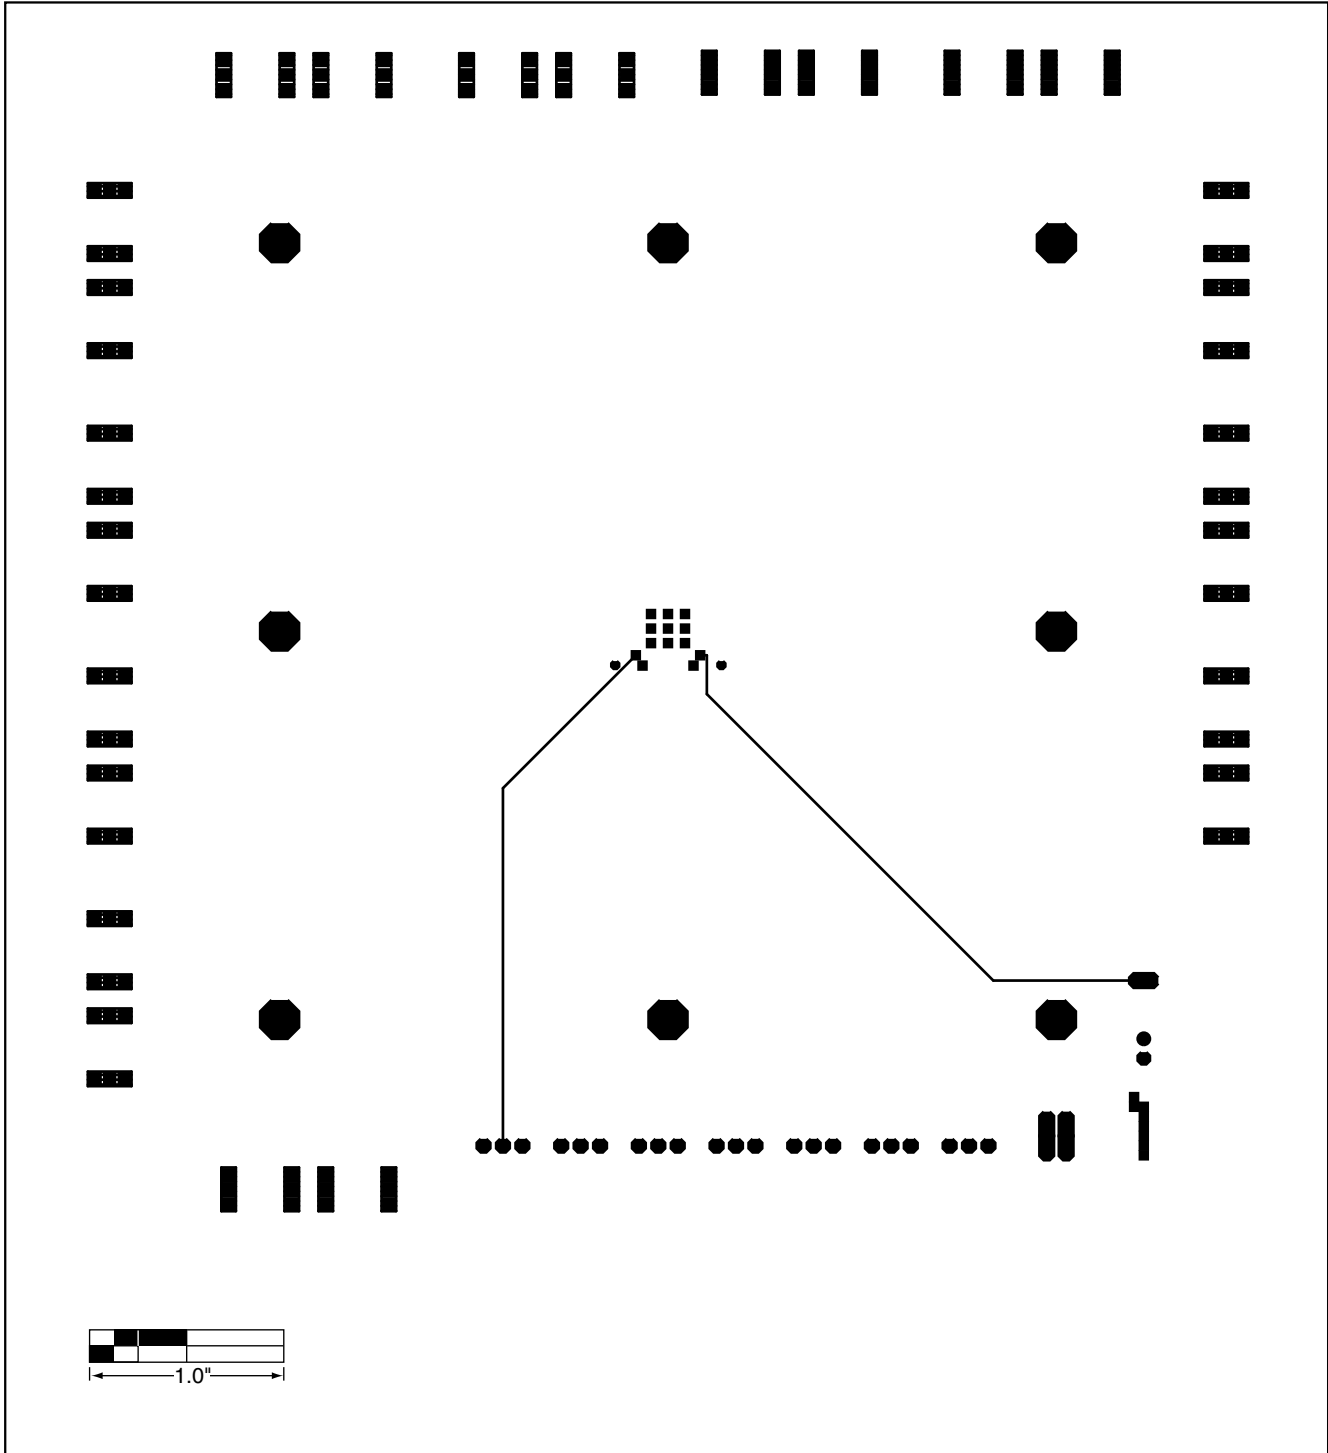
MAX3754/MAX3755 Evaluation Kit PC Board Layout—Solder Side
